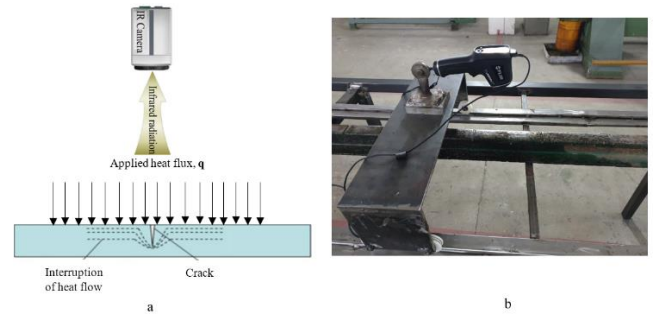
Configuration of thermography inspection system (a) Schematic diagram for thermography (b) Thermography inspection layout.
